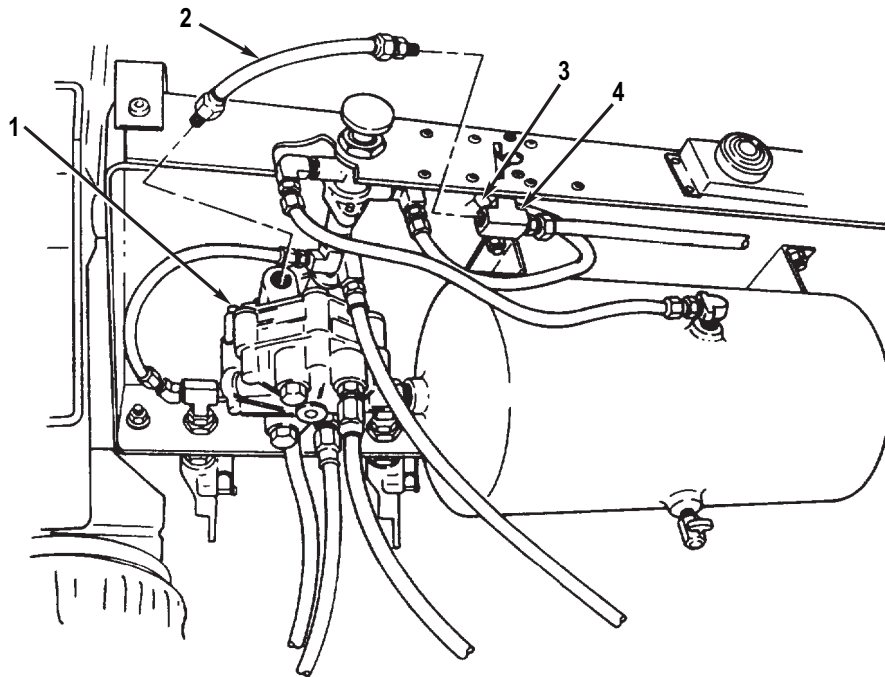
Full Function Valve-to-Relay Valve Tube Assembly Replacement.
